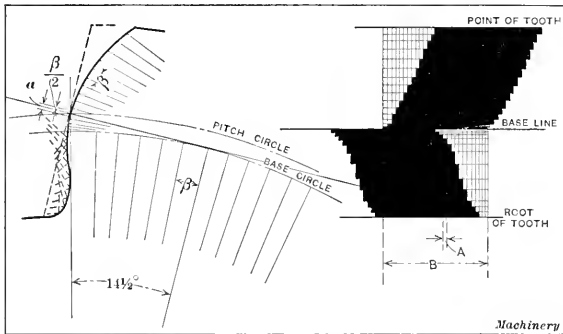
Relative Width and Position of Flats produced by Gear Hobbing Machines. A indicates Feed per Each Generating Tooth; B, Feed per Revolution of Blank
